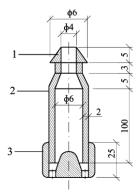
Nozzle with throttle: 1-flexible cone head; 2-nozzle; 3-throttle.
